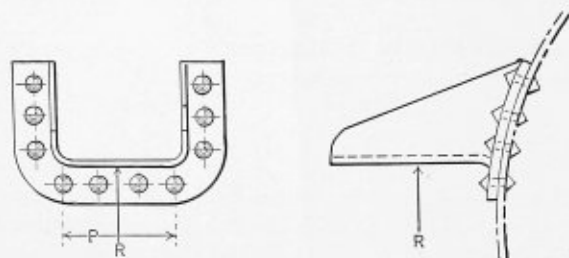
Union Pressed Steel Side Lug for Supporting Boilers
